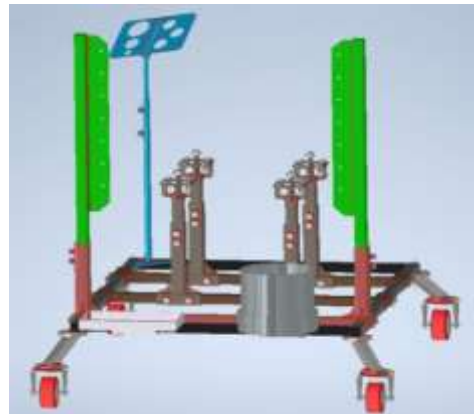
The DETSS under Study: 1) Steel Chassis, 2) Telescopic Motor Mount Holder, 3) Telescopic Engine Holder, 4) Radiator Holder, 5) Radiator Pivot Arms, 6) Battery Holder, 7) Fuel Tank, 8) Motor Mount Arms, 9) Control Panel.
